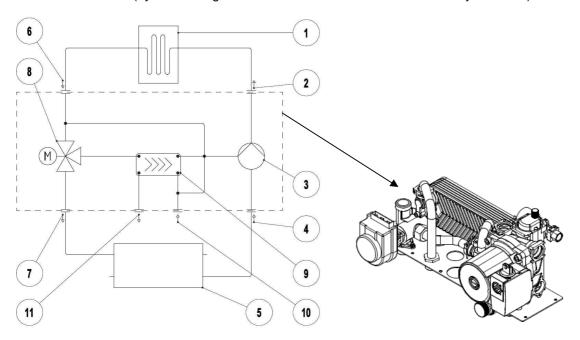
The NAOS K4 boiler assembly (version shown - K4G2S24XX)
